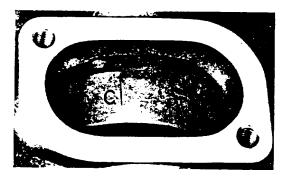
Timing Marks on Fuel Pump Rotor.
